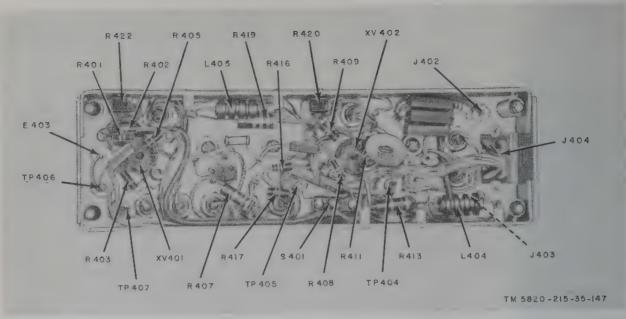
Tsb modulator, alc chassis, bottom view showing resistors.
